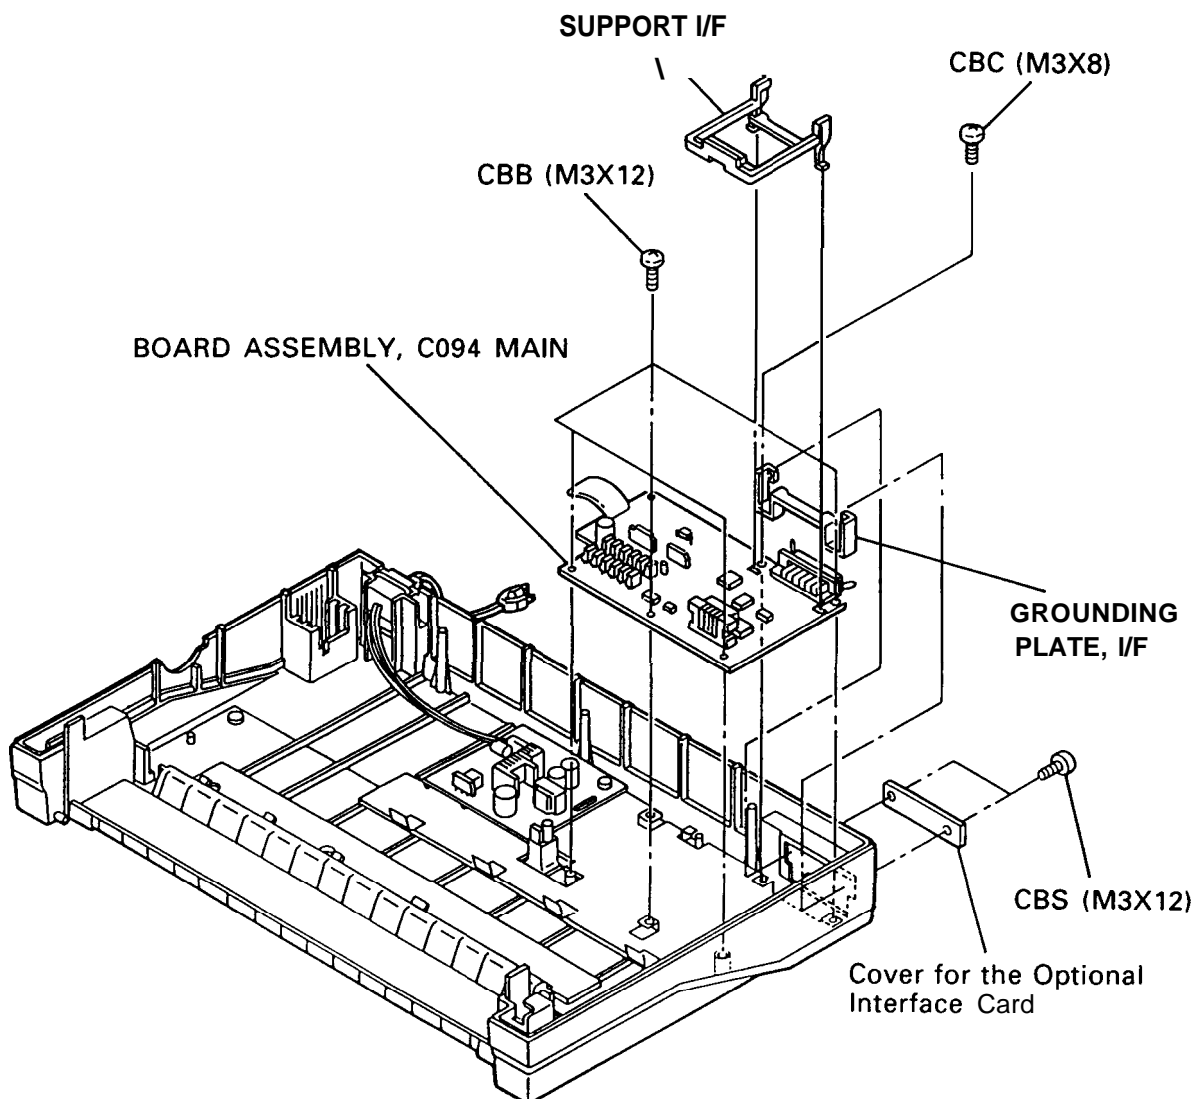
Removing the BOARD ASSEMBLY, C094 MAIN
